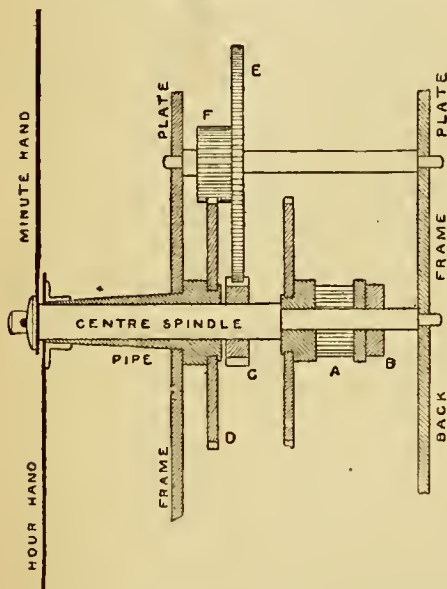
SECTION THROUGH CENTRE SPINDLE.
